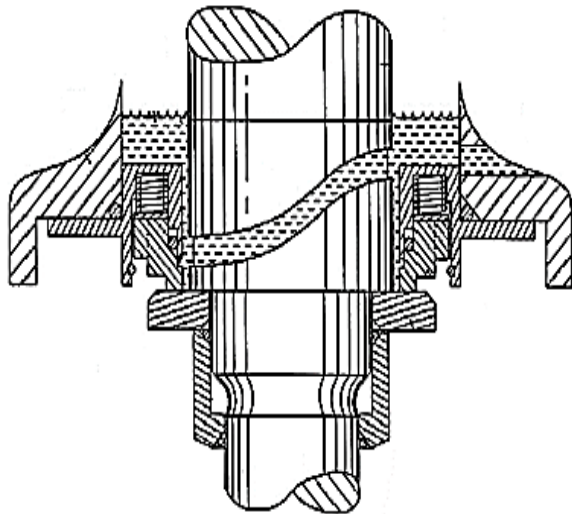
A Vertical Pump Gear Box Seal with Oil [134]
